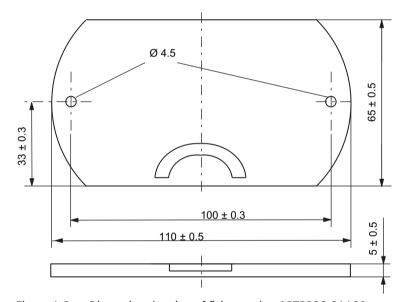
Dimension drawing of fixing pocket 6GT2390-0AA00
